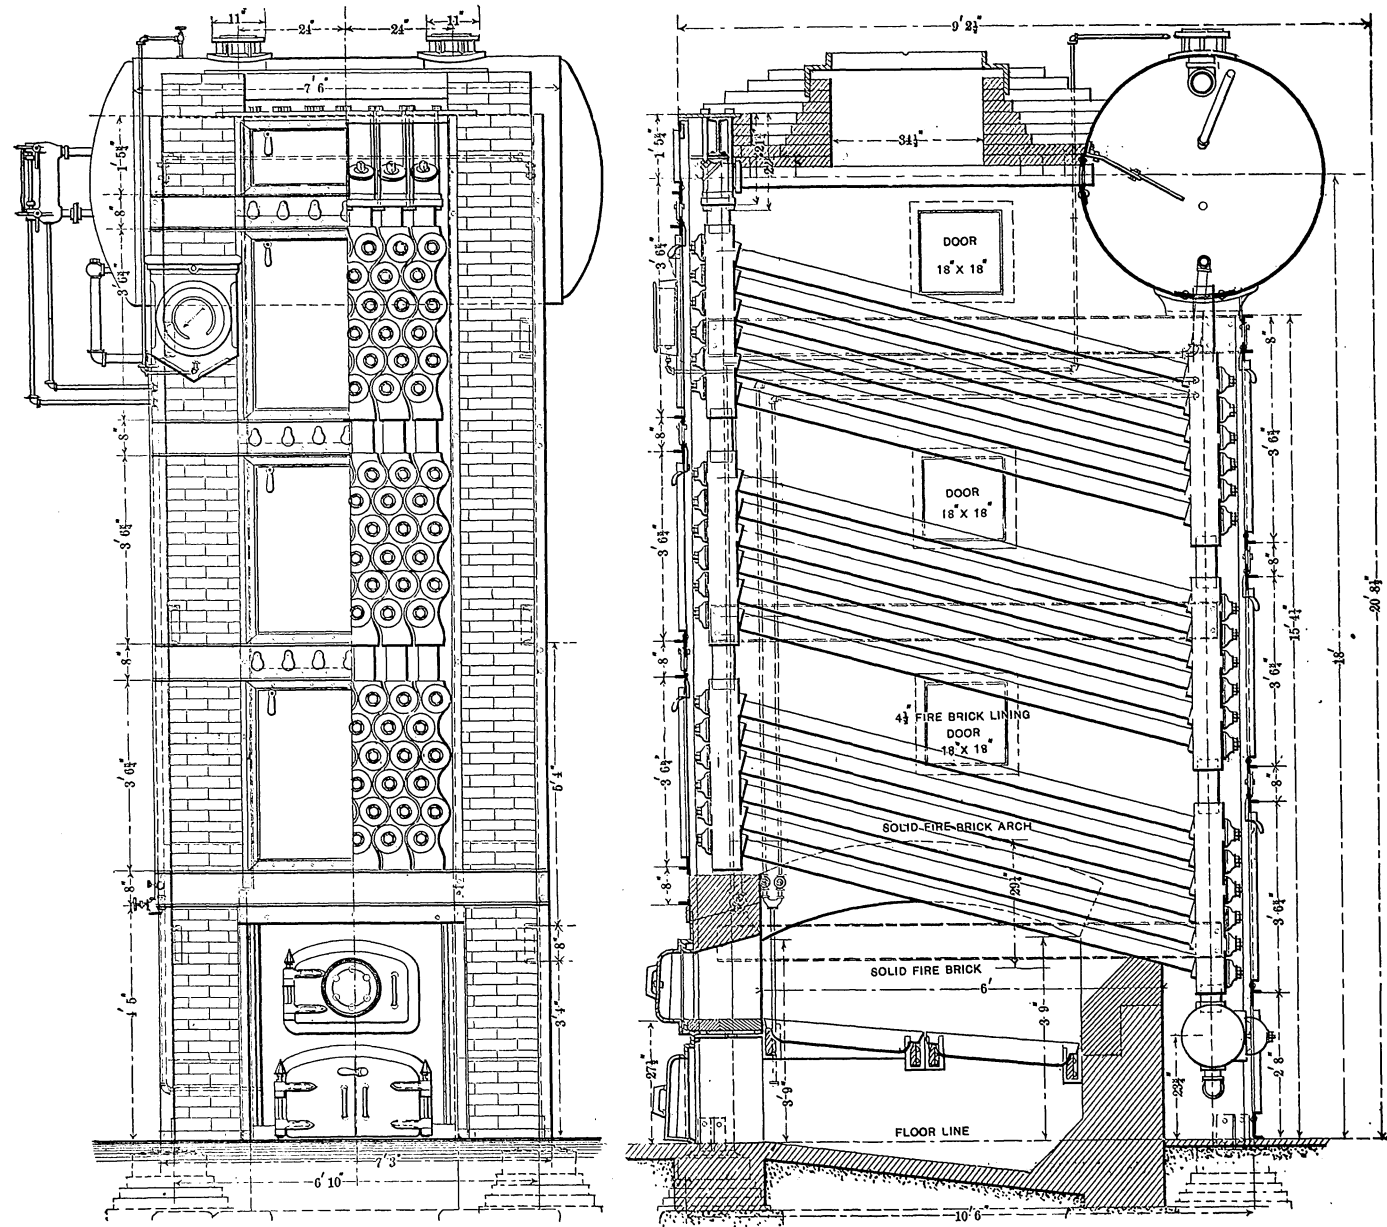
Triple-Deck Babcock & Wilcox Boiler, Utilizing Heat from Scrap Furnace and Billet Furnace.—N. E. Ayer & Co.'s Rolling Mill, Portland, Oregon.
